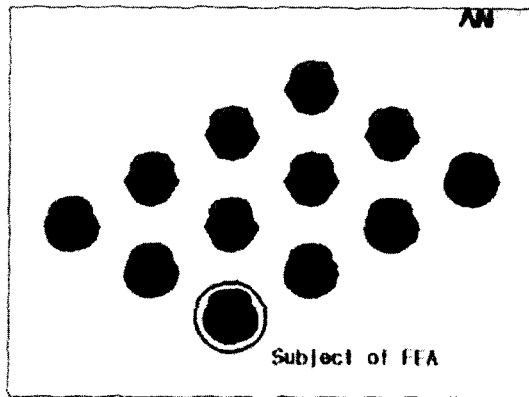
Finite Element Model of  $\mu$ BGA Solder Joint
